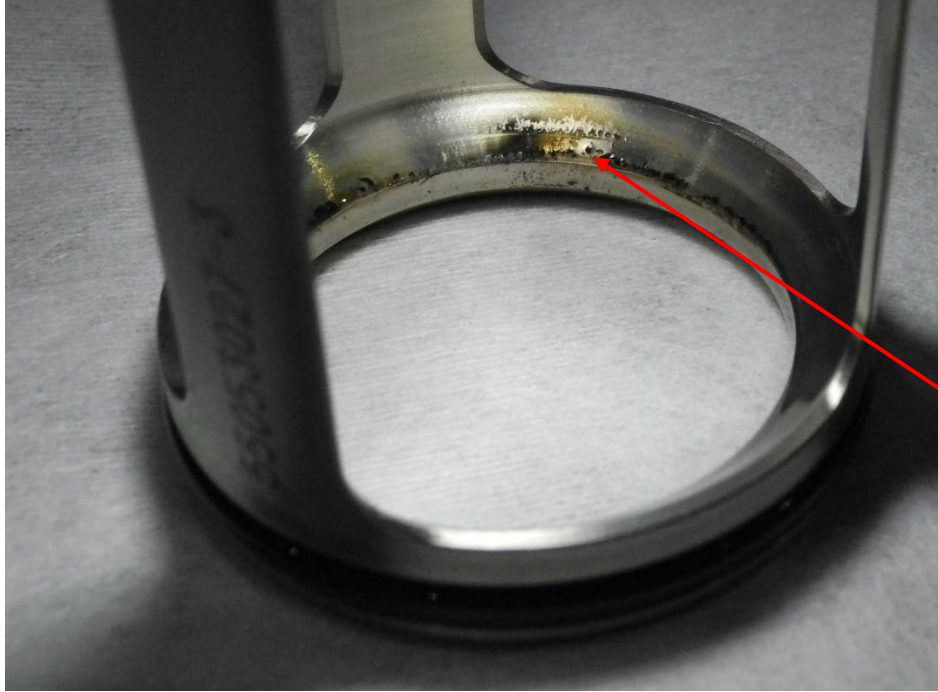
Fuel Filter Bypass Valve – Valve Seat
